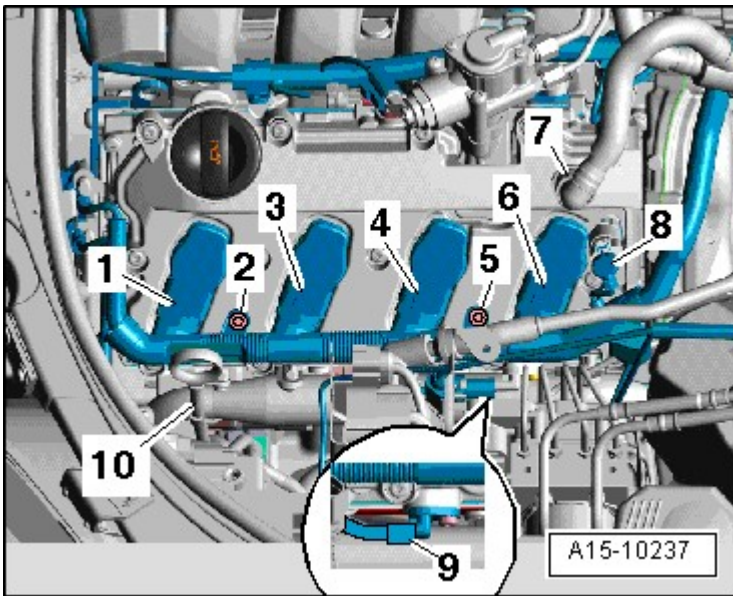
Identifying Oil Dipstick, Bolts, Electrical Connectors, And Ventilation Hose
